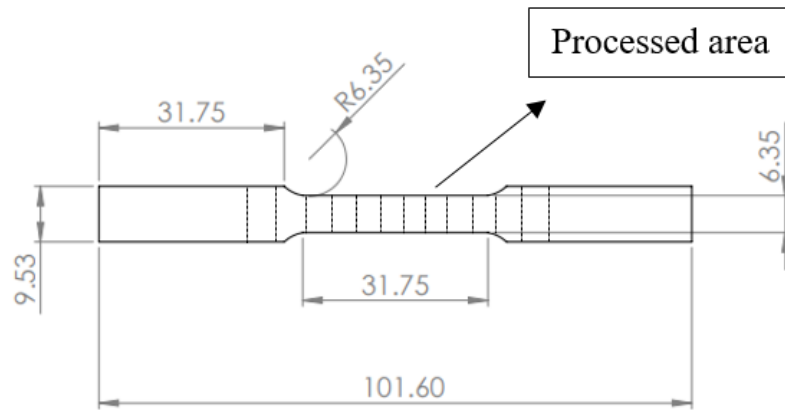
Dimensions of the Tensile test specimen (mm).
